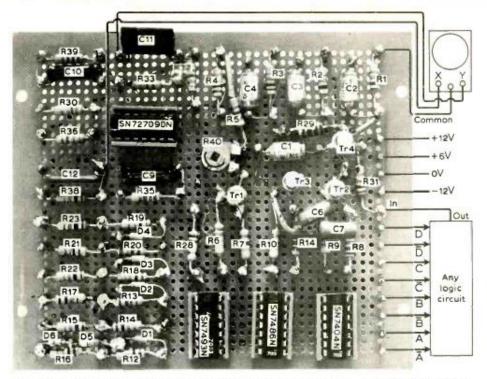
A photograph of the prototype showing component positions. It should be noted that some parts have been mounted on the reverse side of the board and are therefore not marked. The integrated circuits are plugged into dual-in-line sockets which makes for easy removal.
